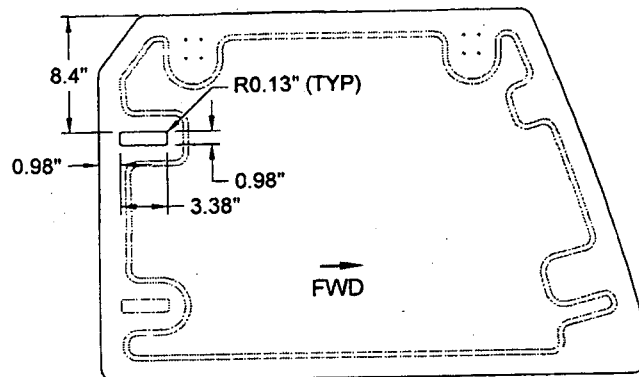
(a) – D3186-1 SPACEPOD™ DOOR LATCH CUTOUT
